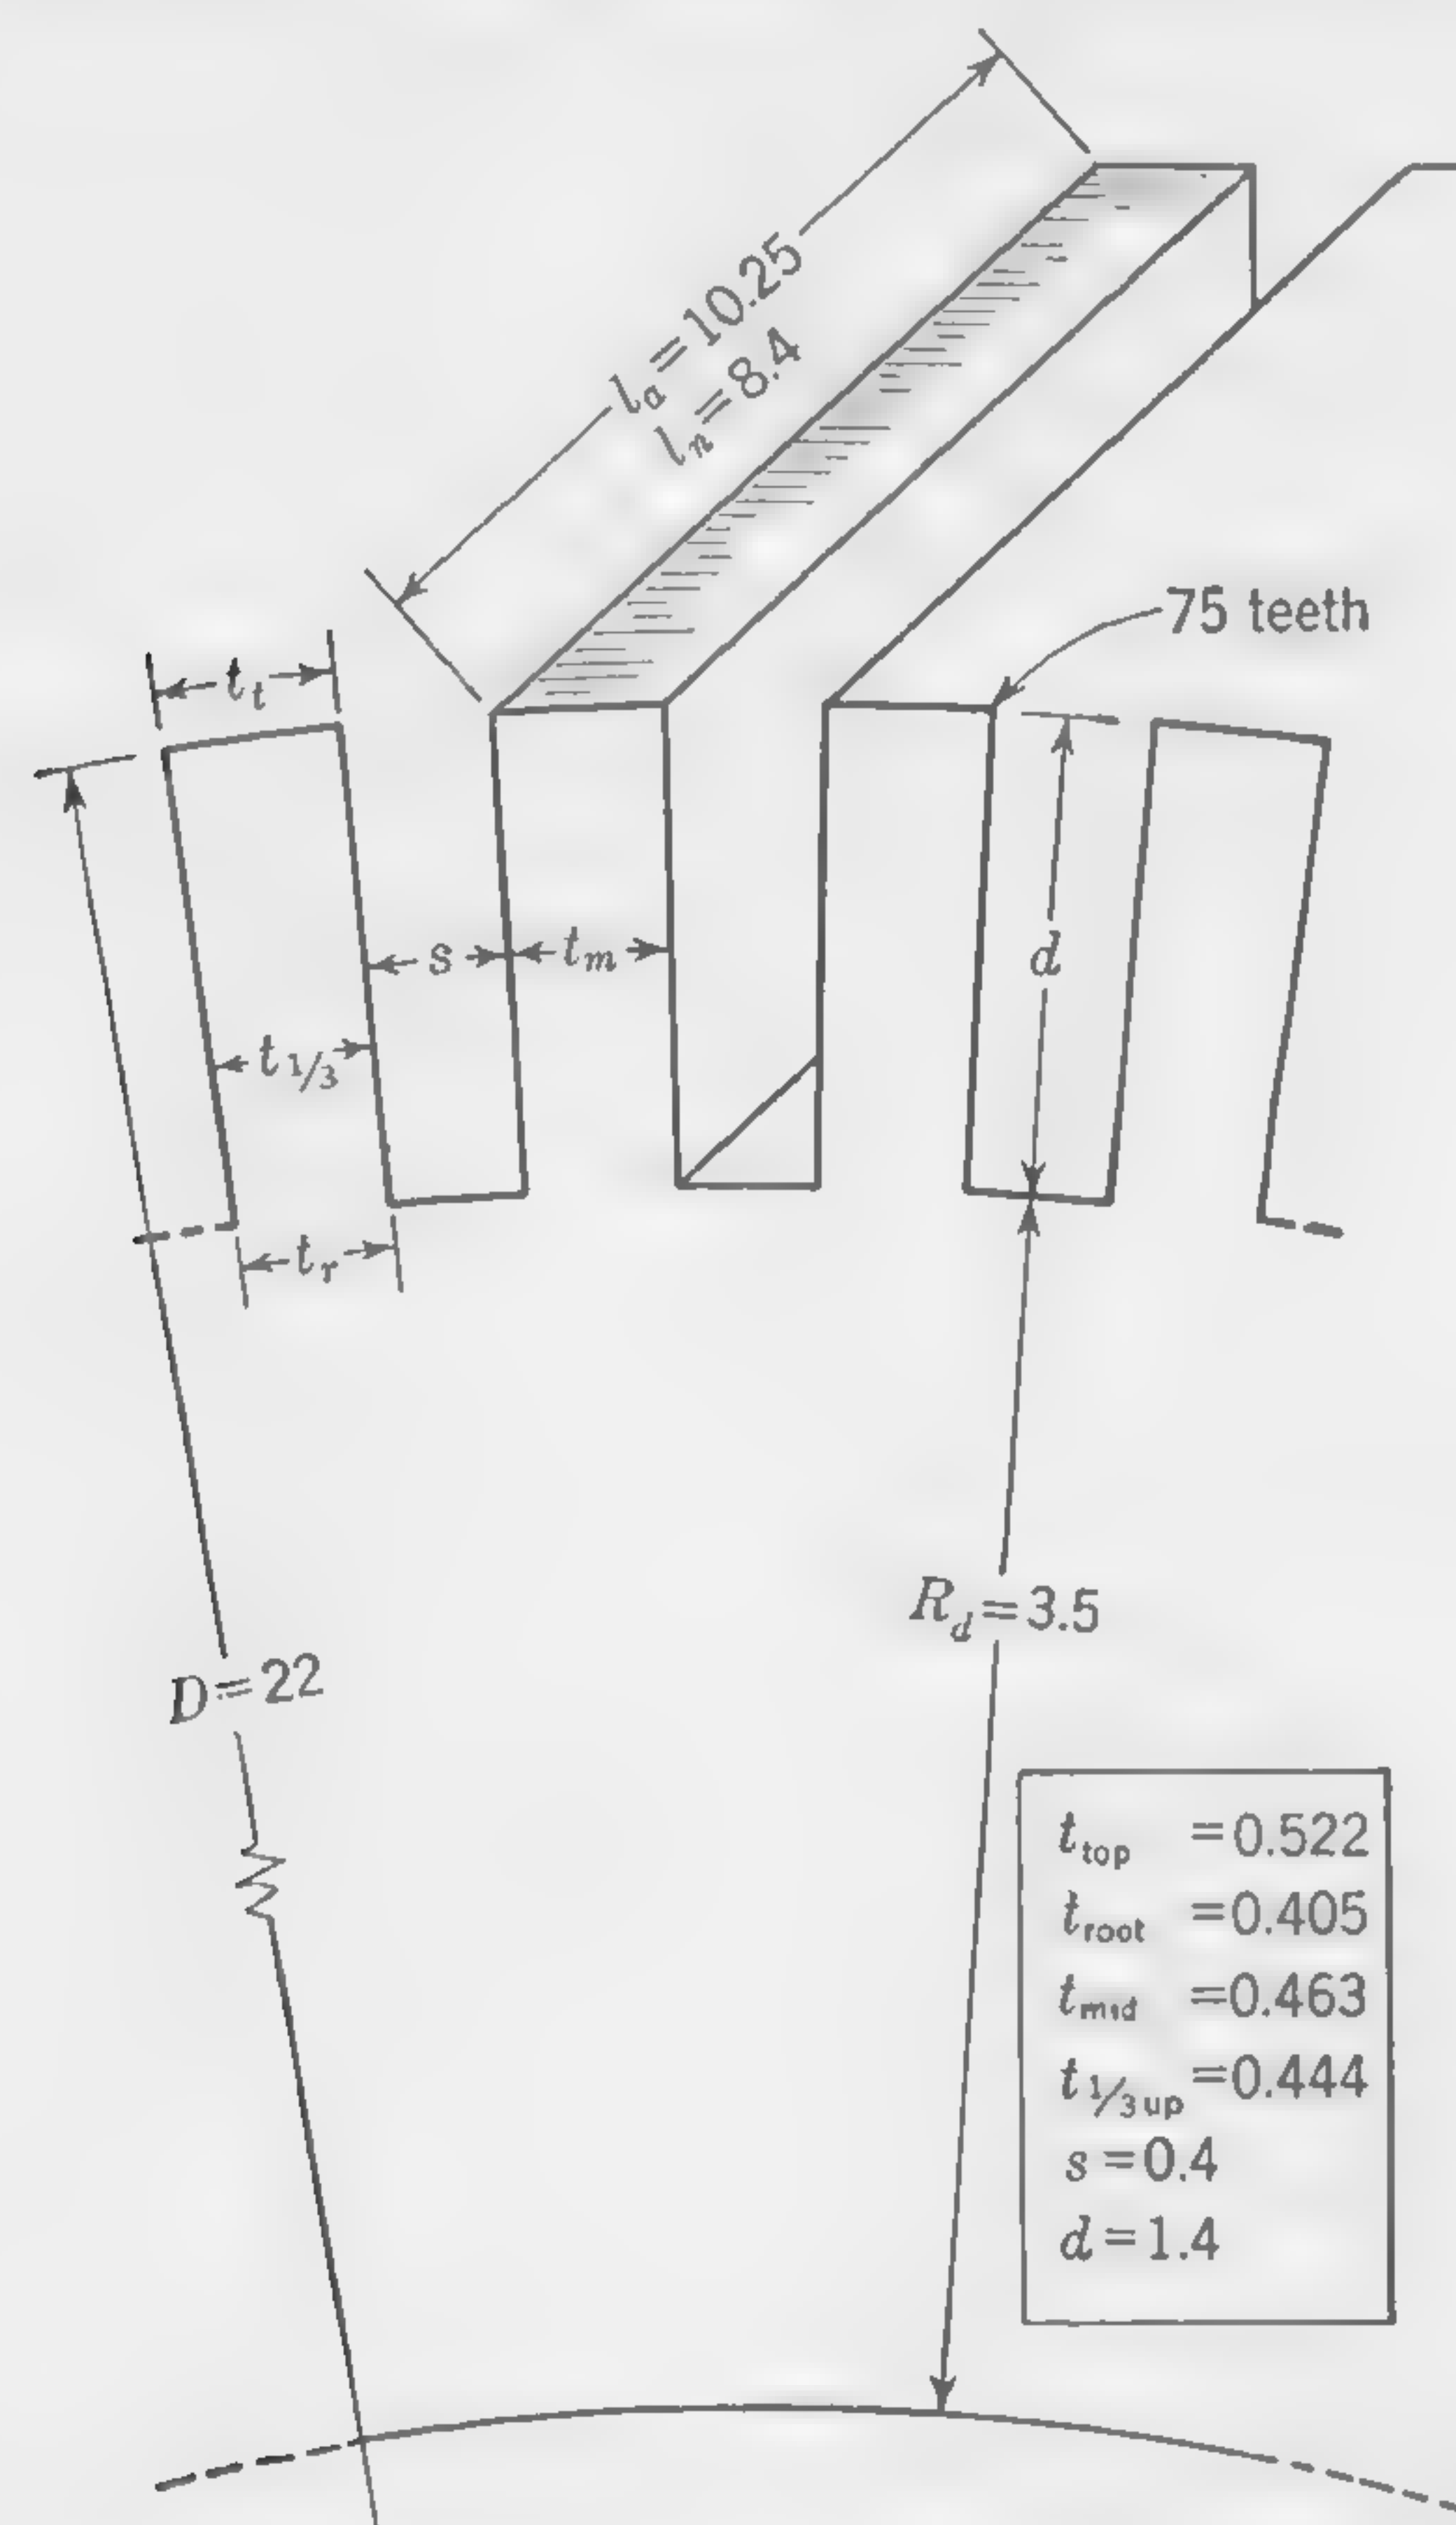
Tooth and core dimensions for Illustrative Example, Art. 53:
